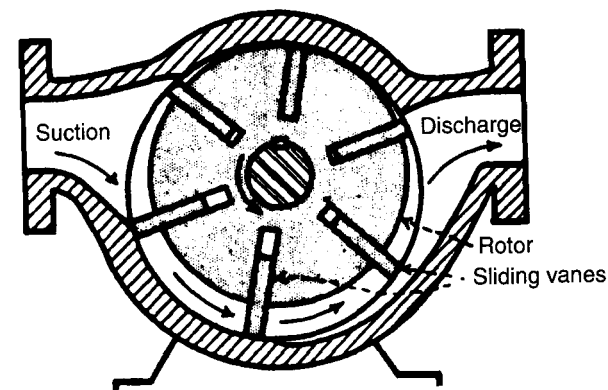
Sliding-vane pump. Courtesy Ingersoll-Dresser Pump Company.
